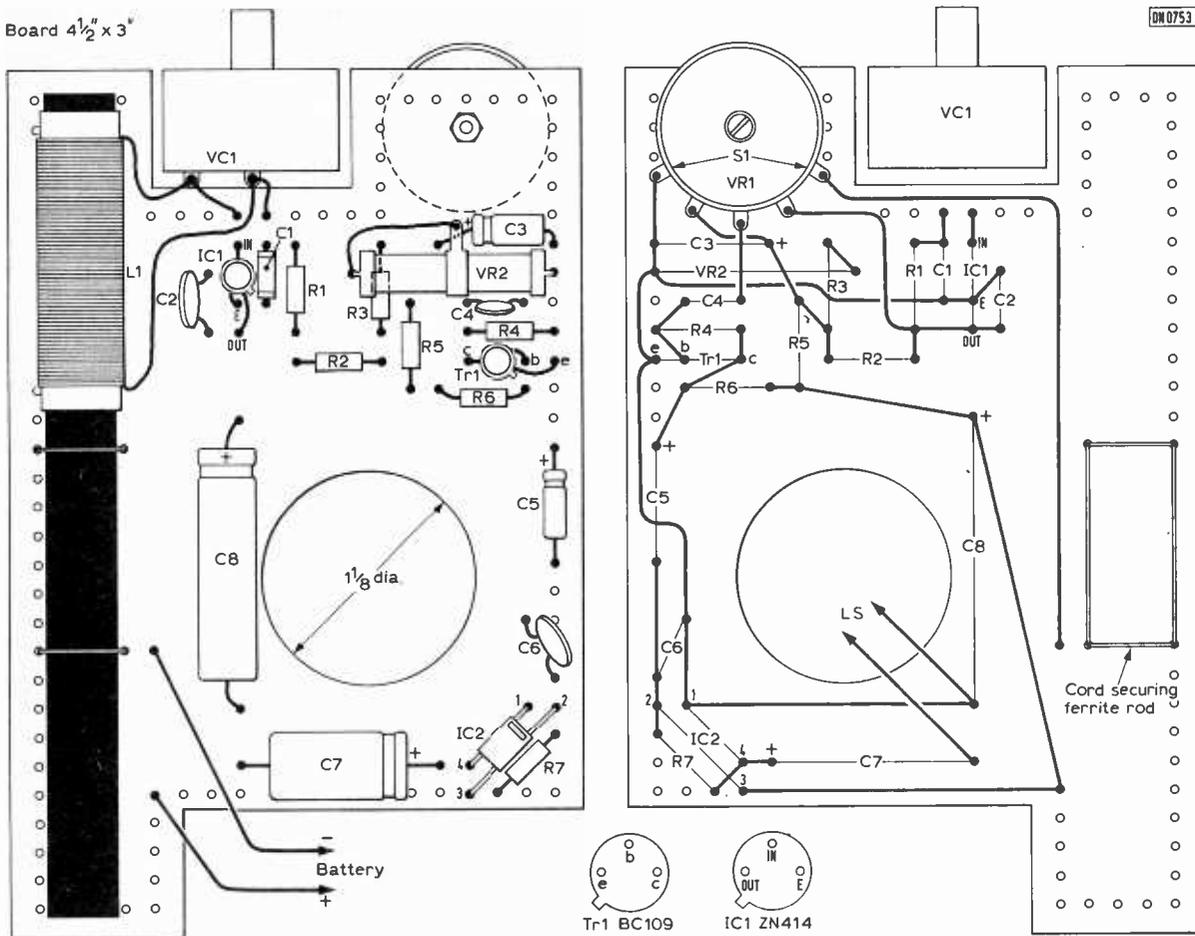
Component layout and wiring. The circuit board is 0.15in. matrix plain Veroboard.
